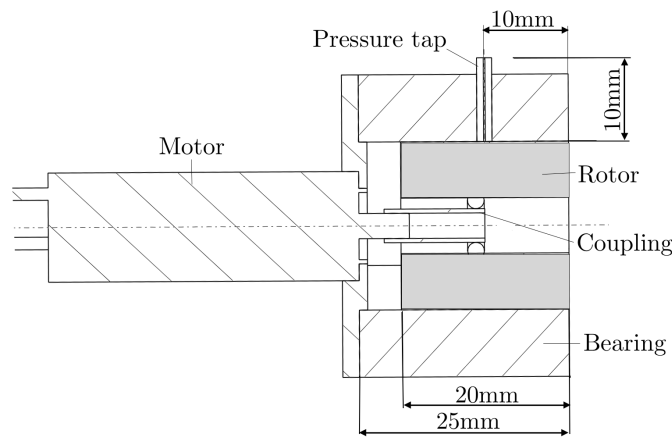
Axial cut of the motor-rotor-bearing system: 1) Motor 2) Bearing 3) Rotor 4) Coupling 5) Pressure tap
